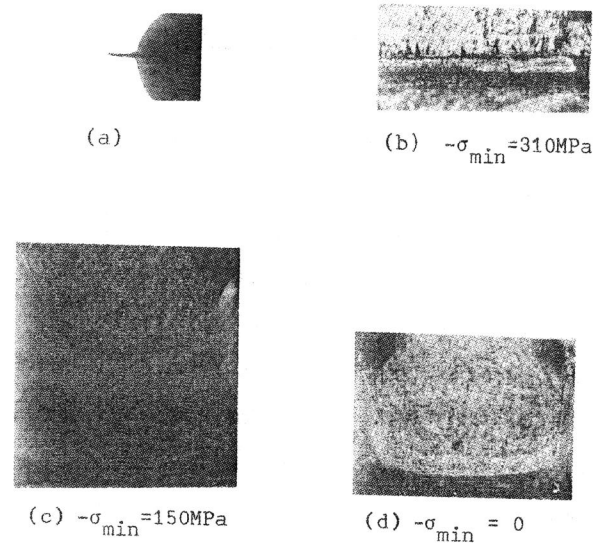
Fatigue crack (a) and macro-fractographs (b-d) under cyclic compressive stress
